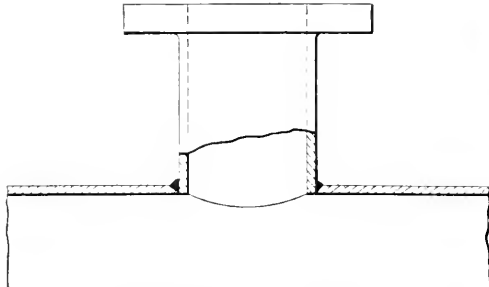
SECTION SHOWING CONSTRUCTION OF WELDED JOINT
